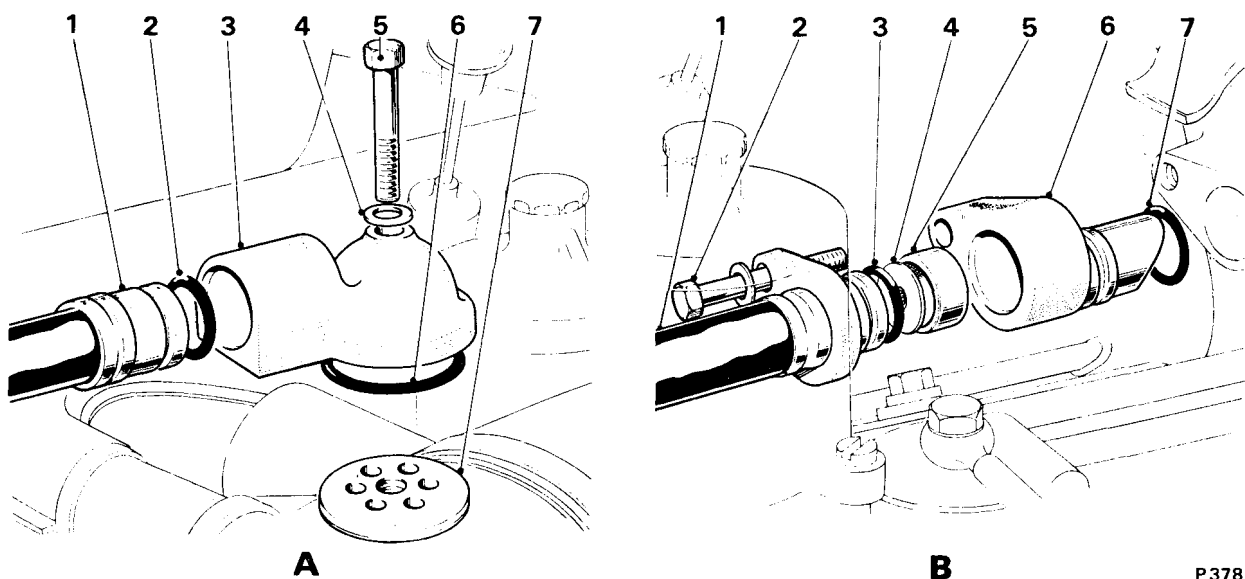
EXPLODED VIEW OF CRANKCASE EMISSION CONTROL PIPE
